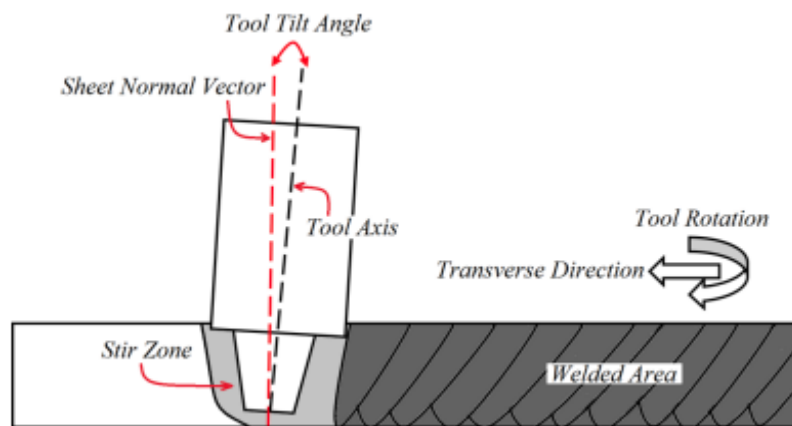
Friction stir welding tool tilt illustration (Elyasi et al., 2016).
